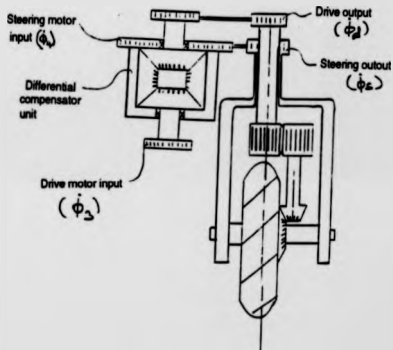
Type-3:B SDMR incorporating mechanical compensator unit.
